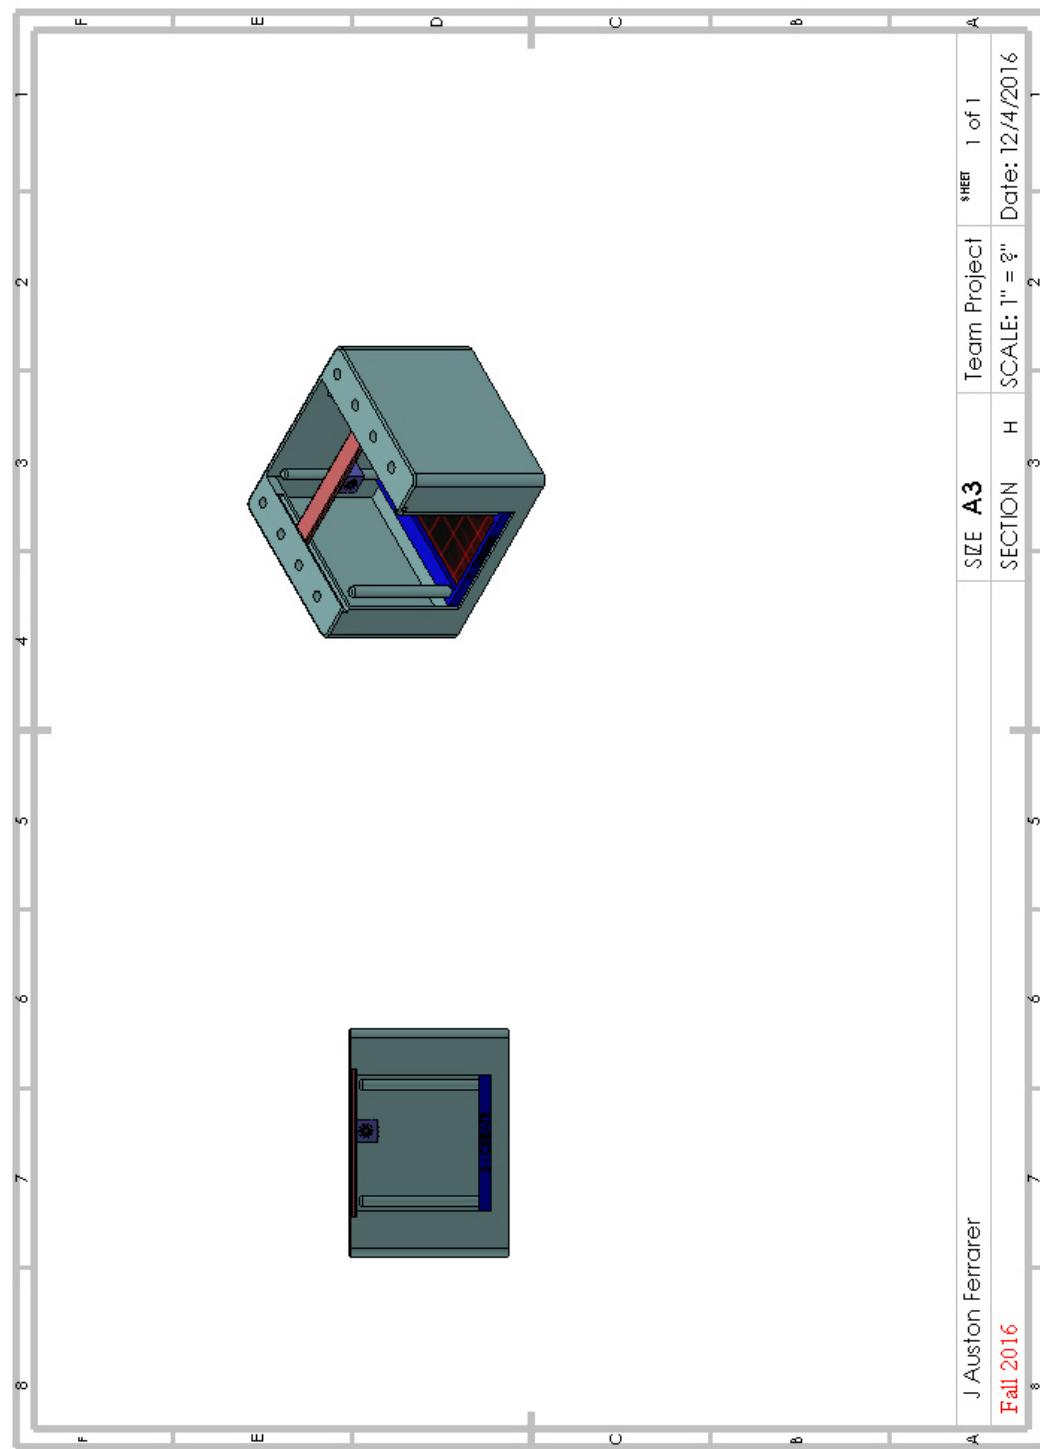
Ferrarer, Auston: Full 3D Printer
